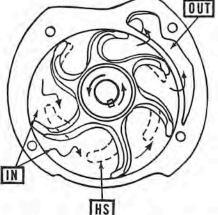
Schematic view of rubber impeller type water pump. Flexing of impeller blades in offset housing causes water to be drawn into pump through inlet ports (IN) and forced into power head through outlet ports (OUT). At high speeds, blades remain partially curved as shown by broken lines (HS) and pump becomes a centrifugal pump.
